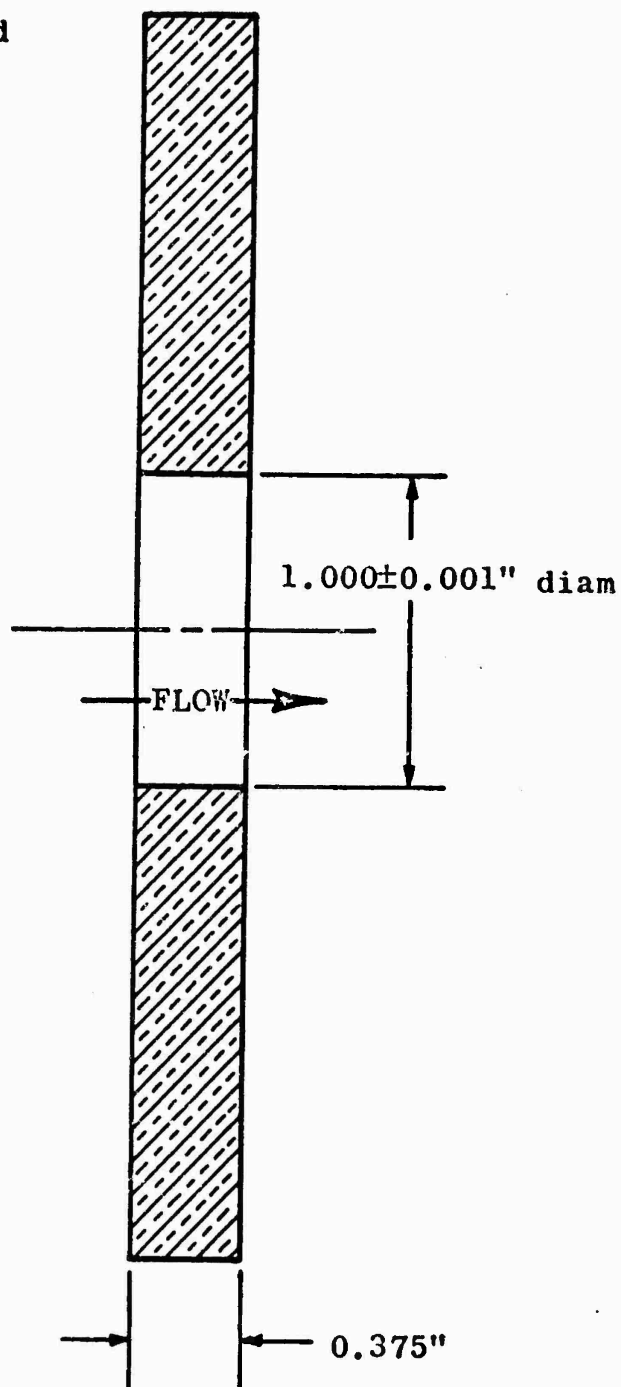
1.000 INCH DIAMETER SHARP EDGE NOZZLE.
